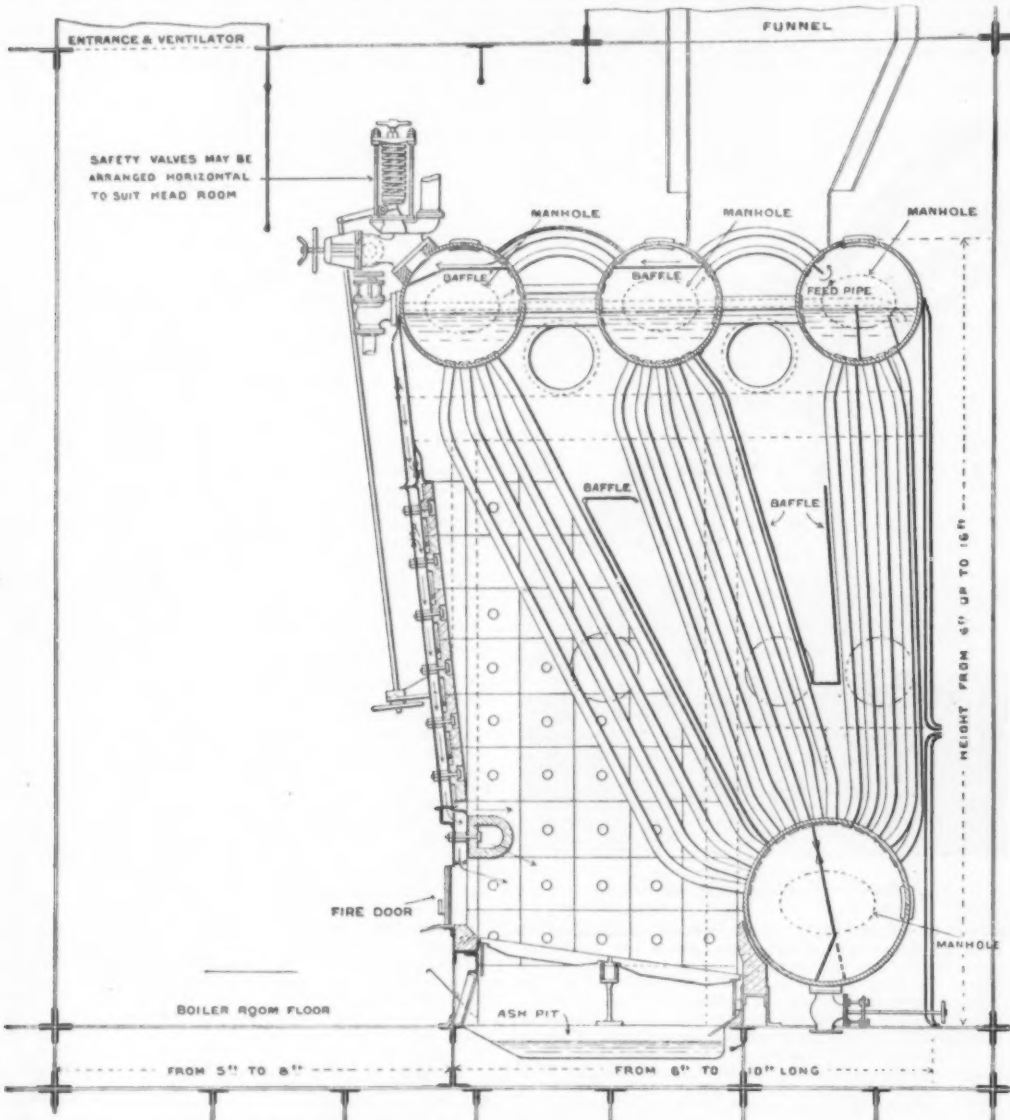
STIRLING BOILER FOUR-DRUM TYPE.
